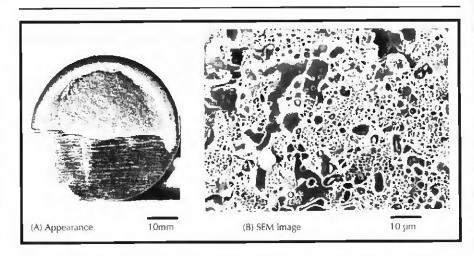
Flat fracture observed on fracture surface from bending test. A — Appearance (10 mm); B — SEM image (10µm).
